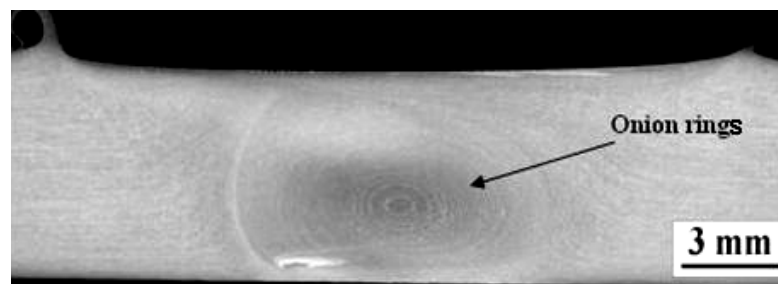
illustrates the transverse cross section of a FSW weld, where two main weld zones are classified; the shoulder flow zone and nugget zone. These two weld zones are formed due to the interactions of the workpiece with the tool shoulder and tool pin respectively, and most likely form independently [9, 10].
